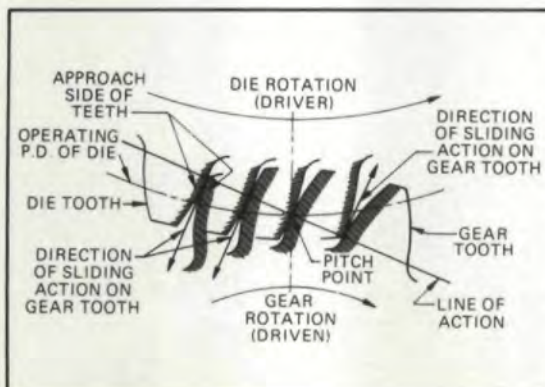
(left)—Contact action between one tooth of a workpiece and the approach side of a rolling die tooth.
